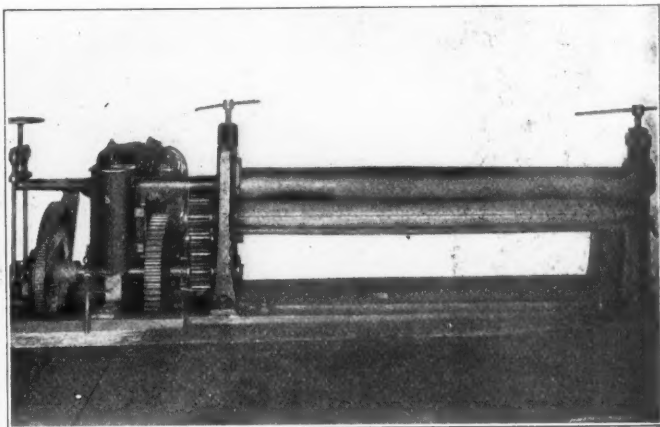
Bending Rolls. Driven by Series Motor and Reversing Controller. 71-2 H.P. Motor, 750 r. p. m. Renold Chain Drive. Chain Speed 950 feet per min.
